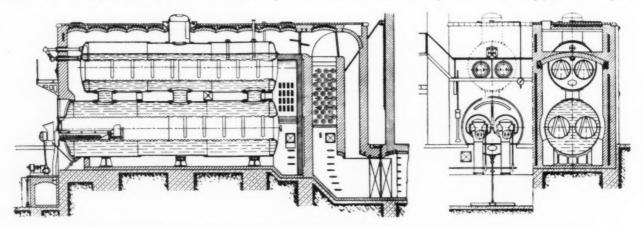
SECTION AND END ELEVATIONS OF SULZER-LANCASHIRE-TYPE DOUBLE BOILERS AS DESIGNED IN ORDER TO ECONOMIZE FLOOR SPACE
